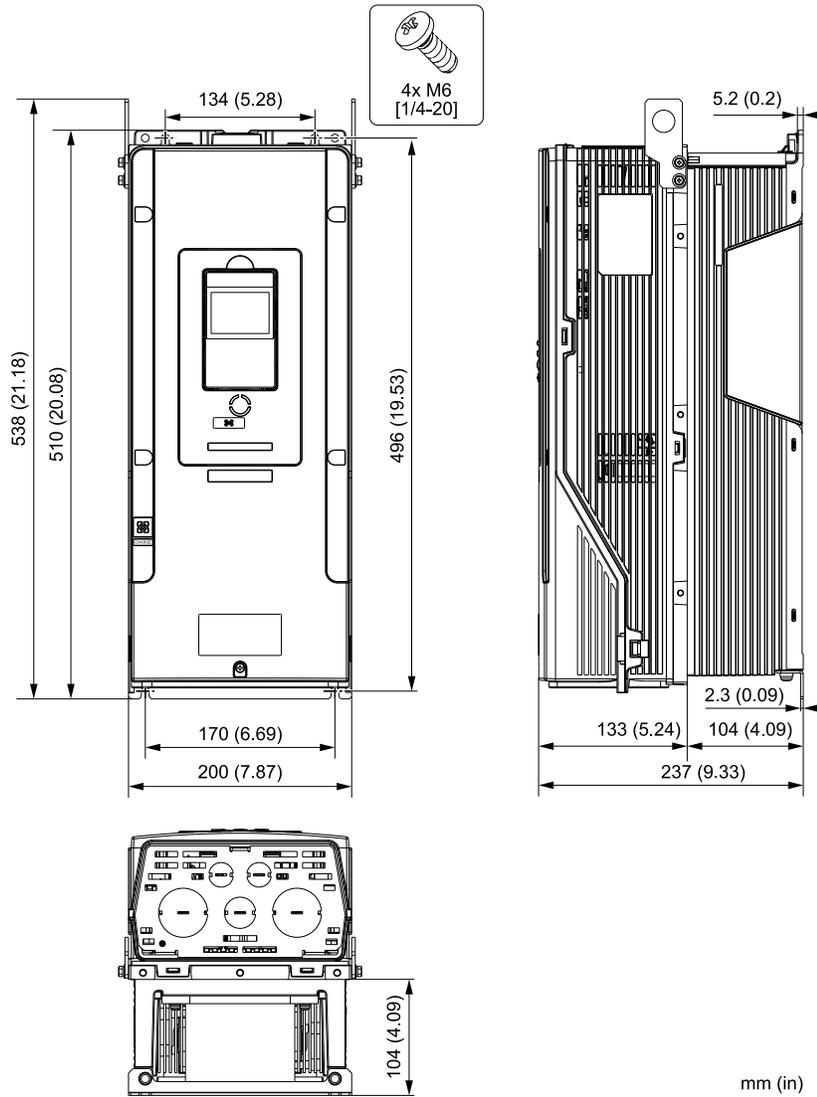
Exterior and Mounting Dimensions Diagram 4
